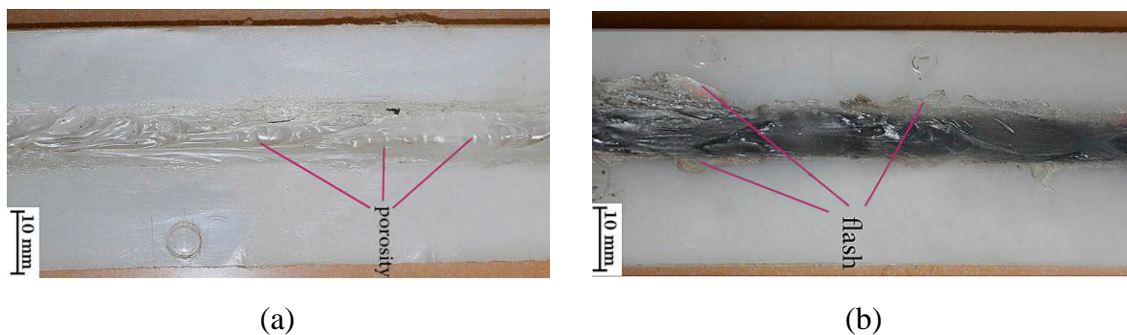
Defects produced with welding speeds: (a) above 30 mm/min and (b) below 20 mm/min [49].
